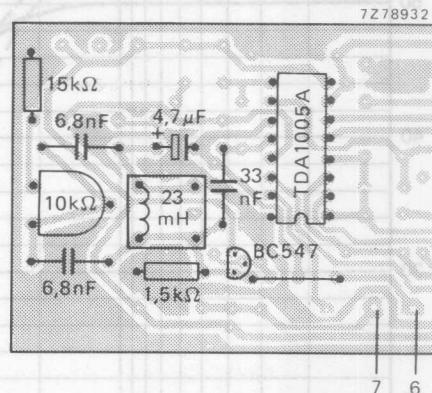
Printed-circuit board component side, showing component layout of Fig. 19.
